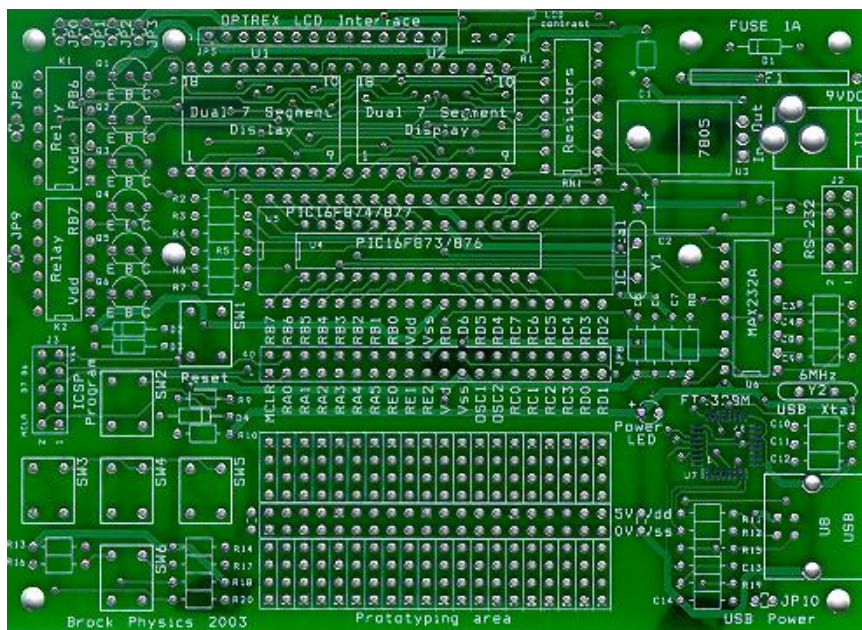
A PICLab printed circuit board, version 1.0, the component side
